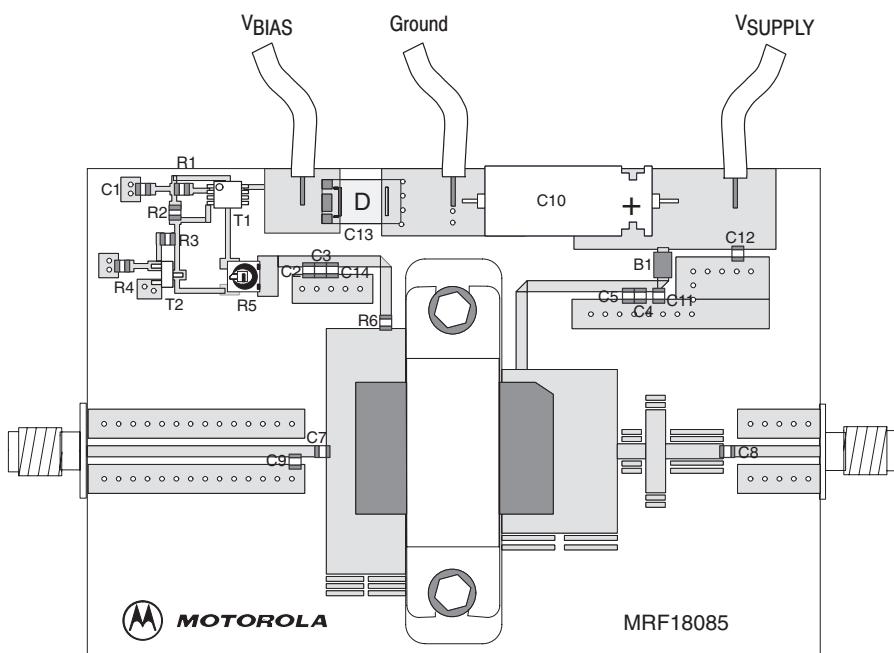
1.93 – 1.99 GHz GSM EDGE Optimized Demo Board Component Layout
